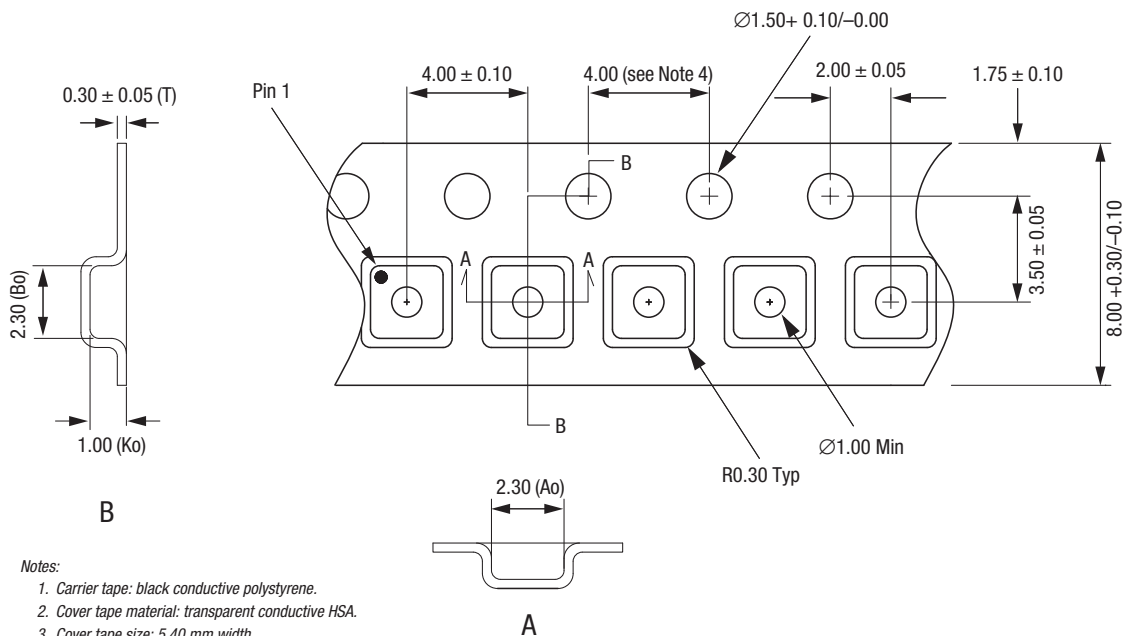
SMP1331-087LF Tape and Reel Dimensions
